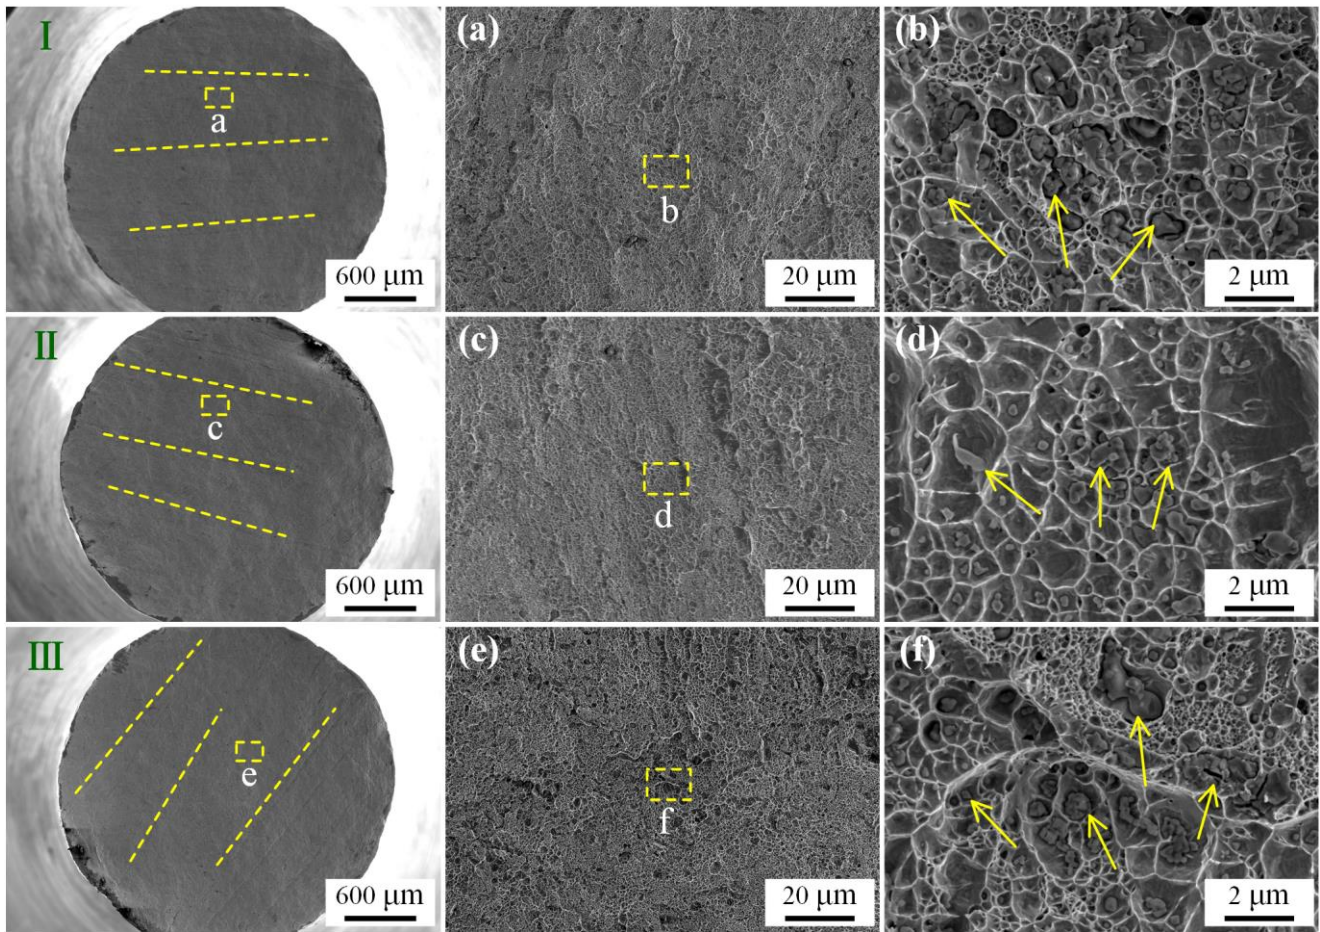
Fracture morphologies of tensile specimens derived from the 2# bonding joint.
